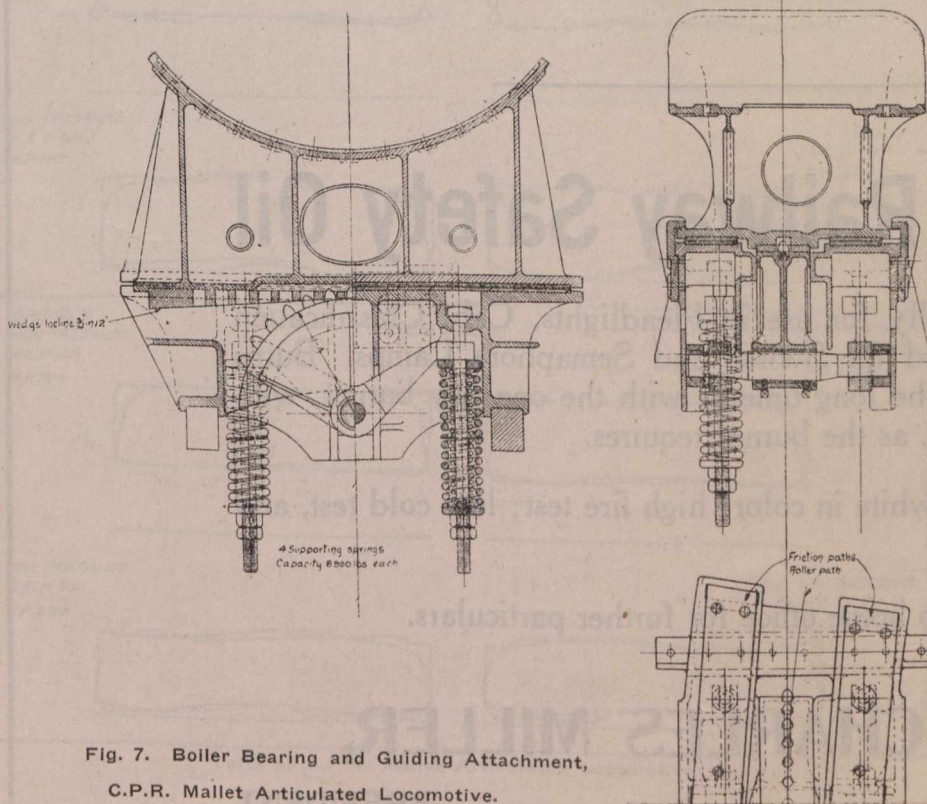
Boiler Bearing and Guiding Attachment, C.P.R. Mallet Articulated Locomotive.
